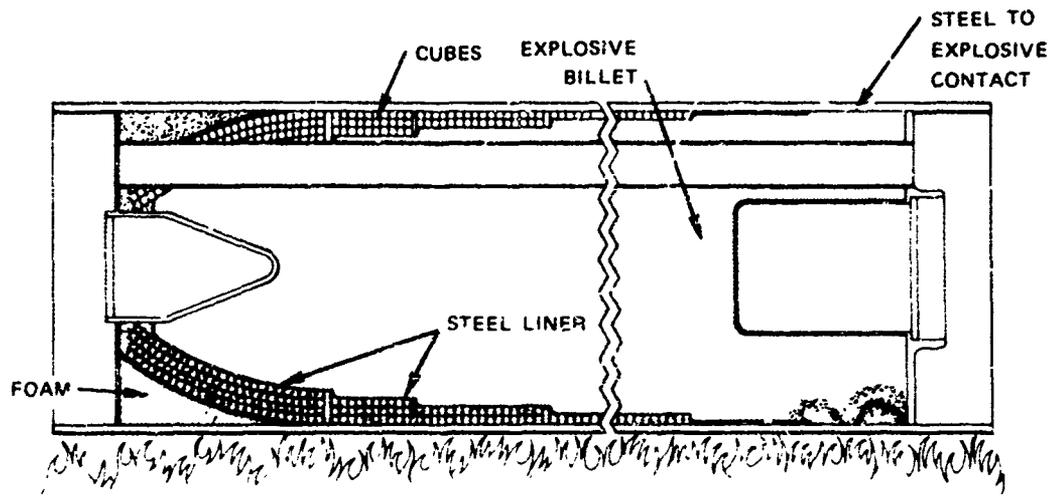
SHRIKE Warhead Explosive Igniting at Lower Aft End.
